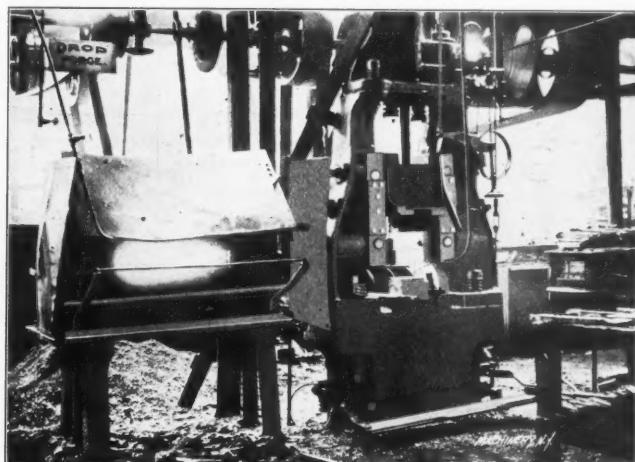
Oil Heating Furnaces and Drop Hammer.
